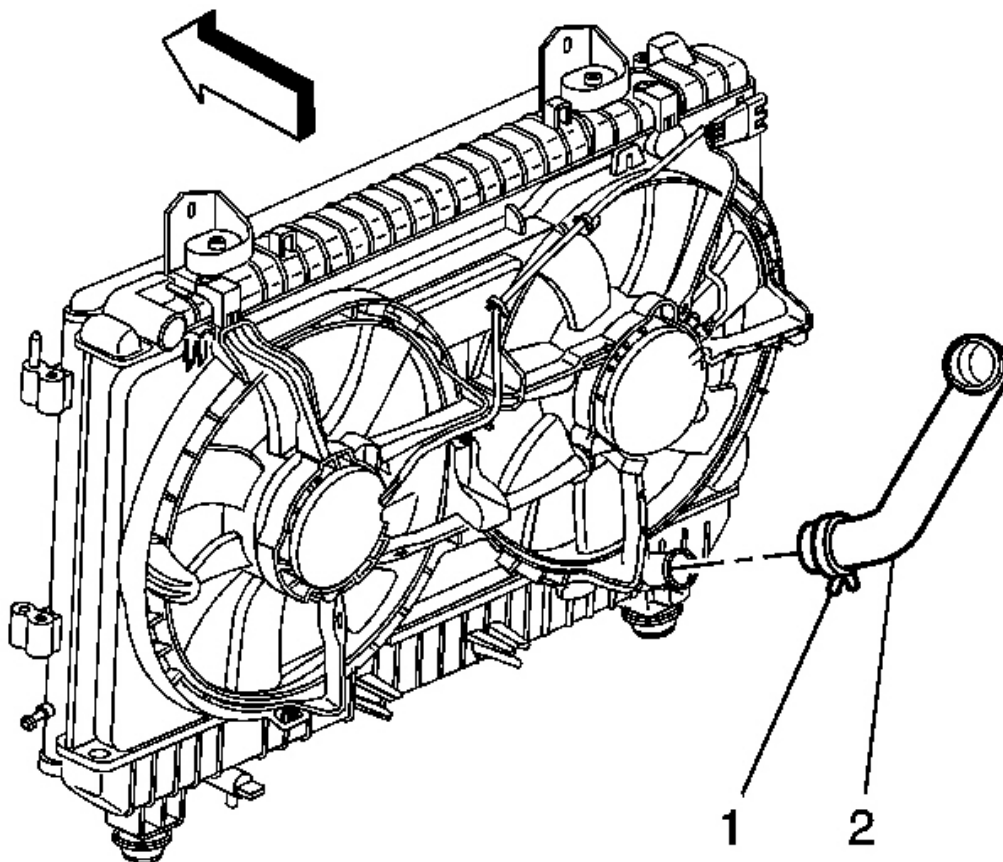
Radiator Outlet Hose & Clamp At Radiator
